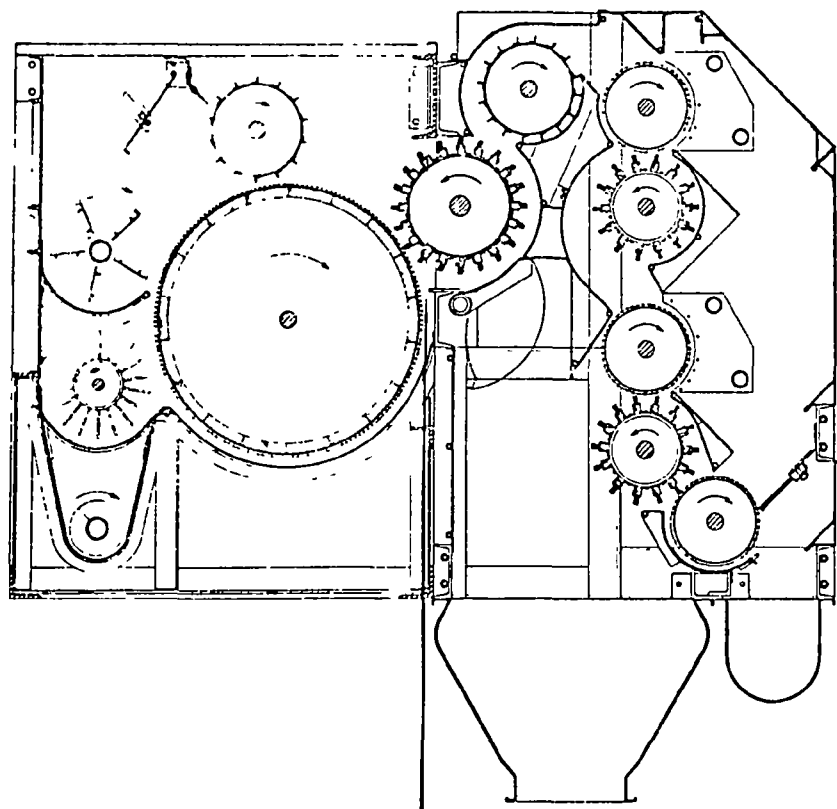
Cross section of bur machine (left) with stick remover attachment added (right).
